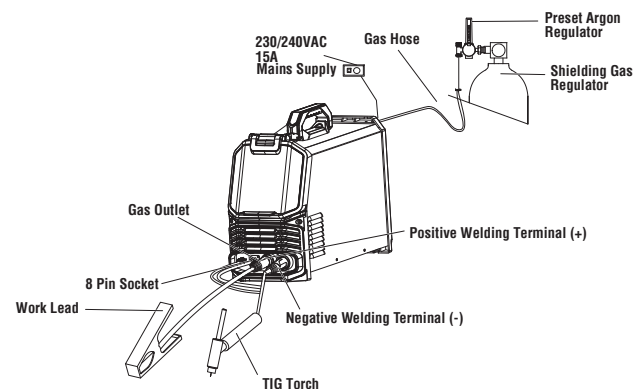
Setup For TIG (GTAW) Welding
